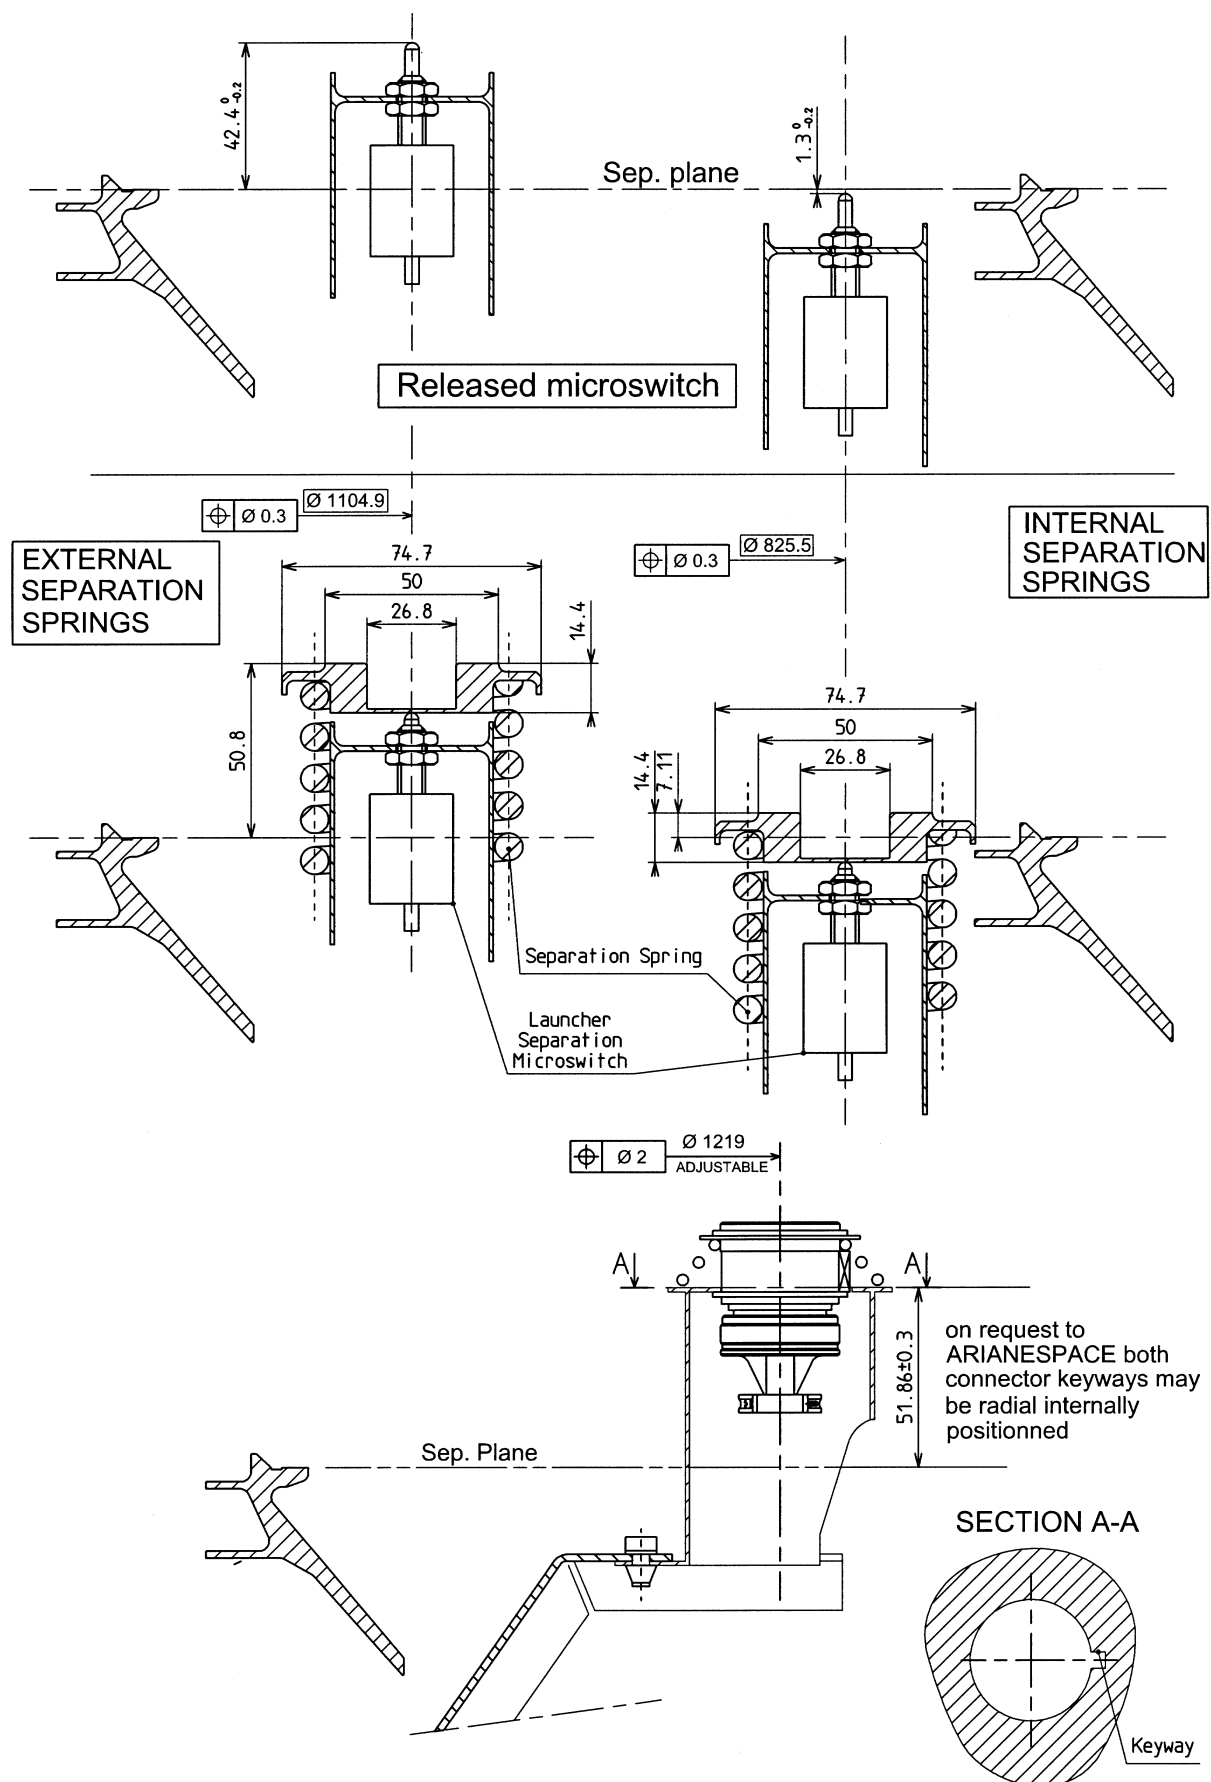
937C adaptor mechanical interfaces (details)
